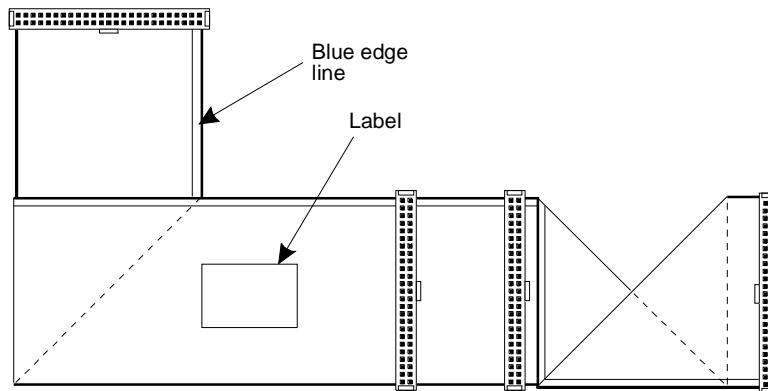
SCSI Cable for SCSI Peripherals; Folded View
